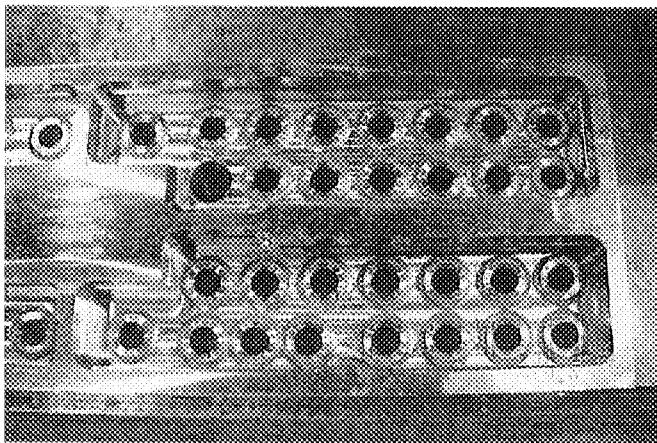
Welded coaxial insert tube of cooling channels
